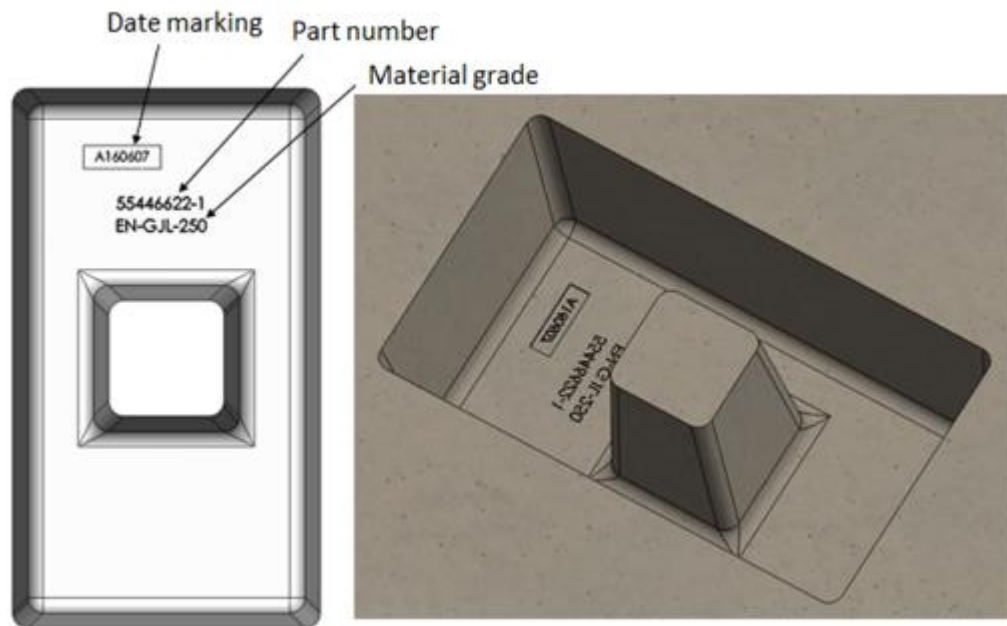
Casting text marking including manufacturing date, part number and material grade. Positive raised text on pattern and casting surface appears as negative recessed text on bottom of sand mould cavity.
